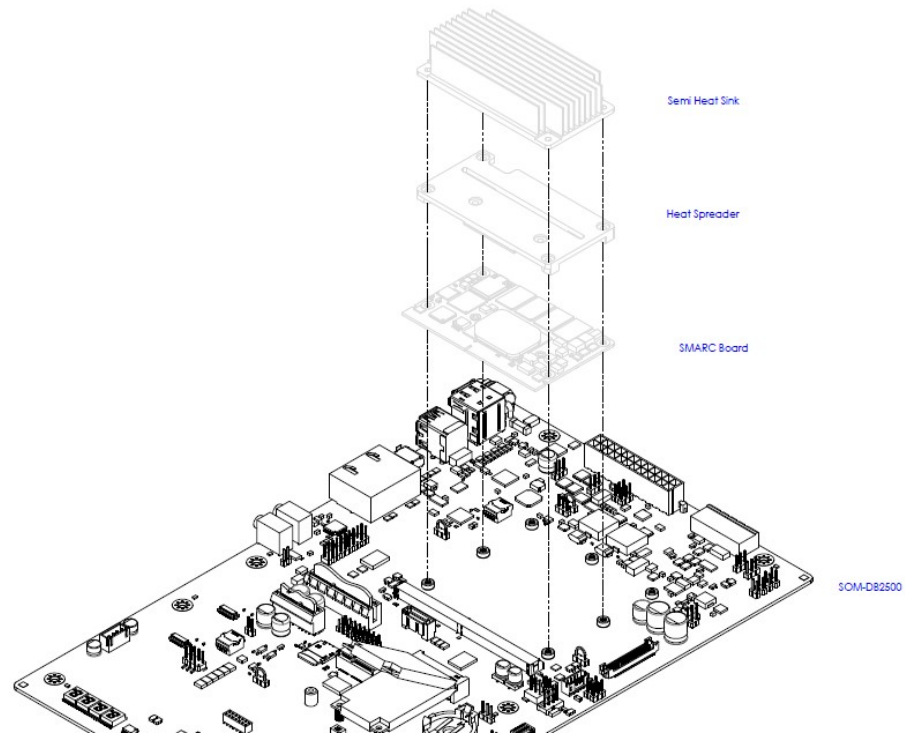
Assembly Diagram- SMARC to SOM-DB2500
